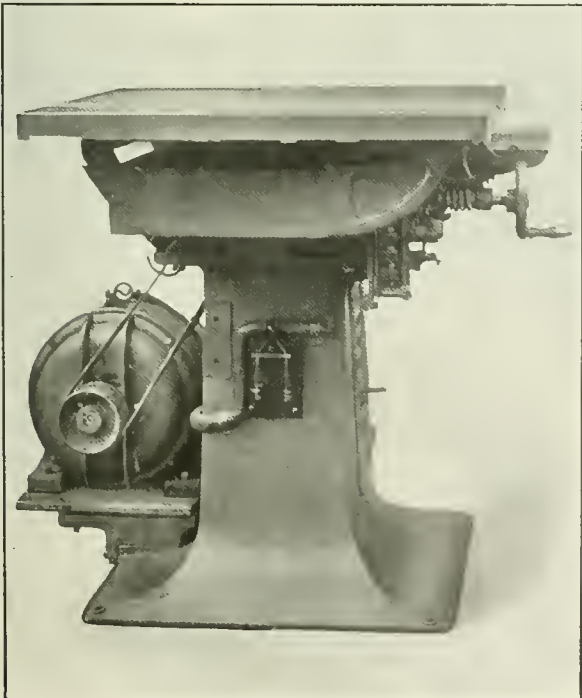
Saw for Trimming Electrotypes, with Enclosed Wiring
